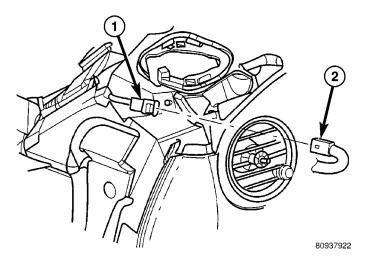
INSTRUMENT PANEL TO OVERHEAD SYSTEMS JUMPER HARNESS CONNECTOR -TYPICAL LEFT OR RIGHT
